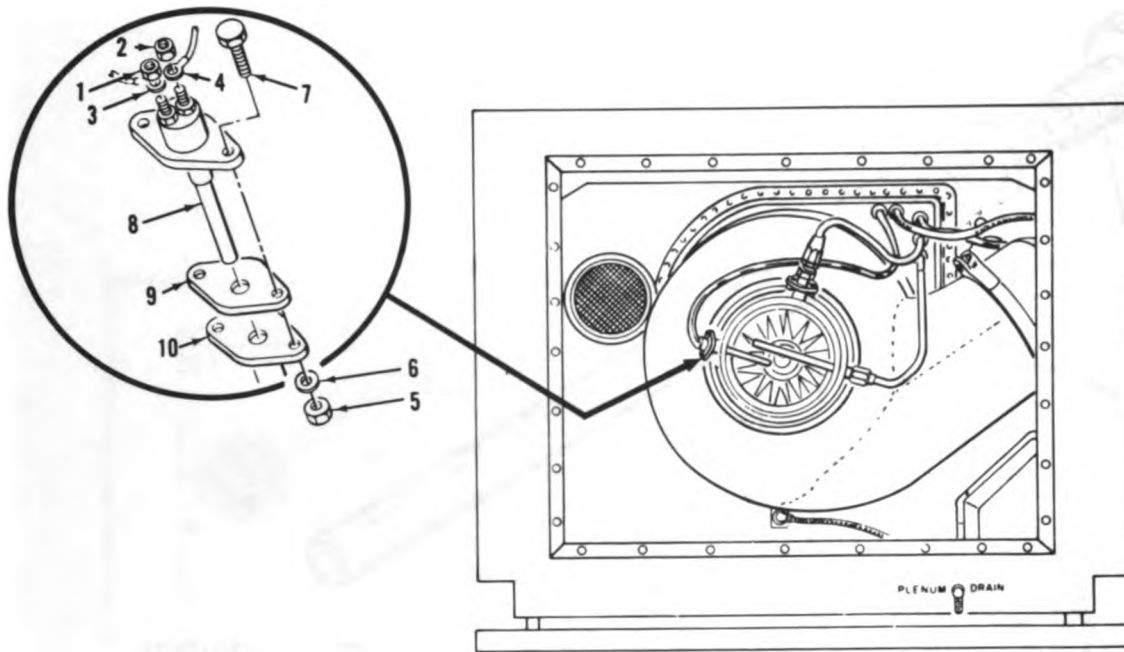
Acceleration and overtemperature control thermostat disassembly and reassembly.
